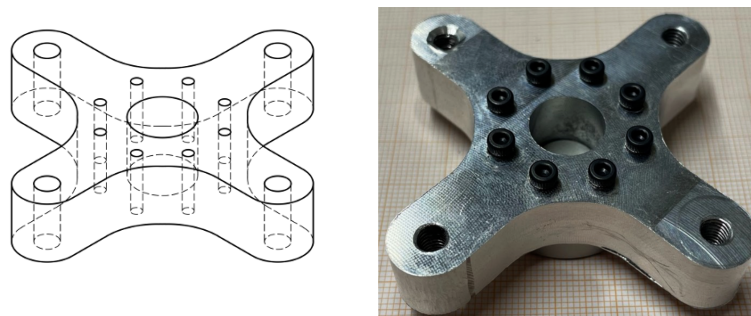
CAD Drawing (left) and as constructed (right) central hub
